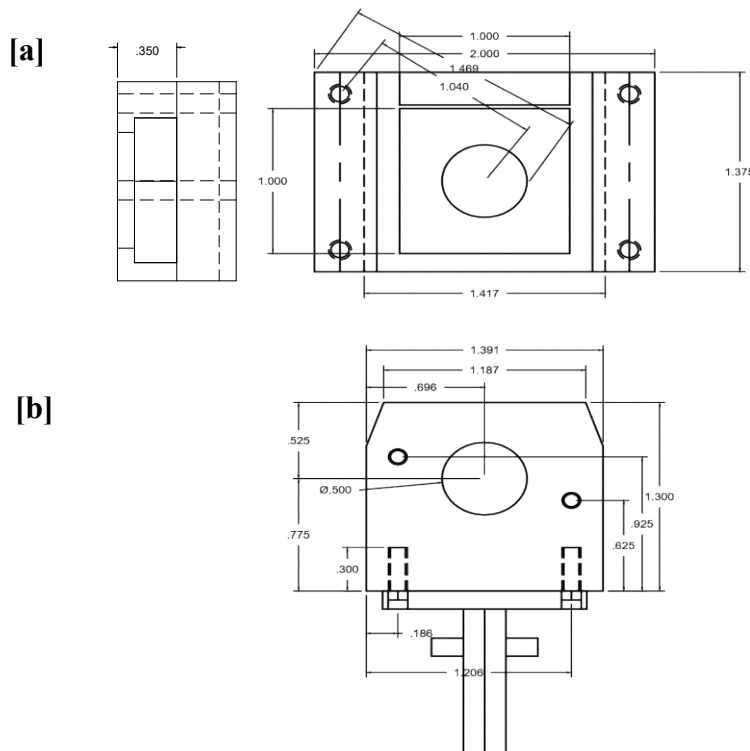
Top view of (a) base piece of sample holder and (b) detachable sample manipulator
